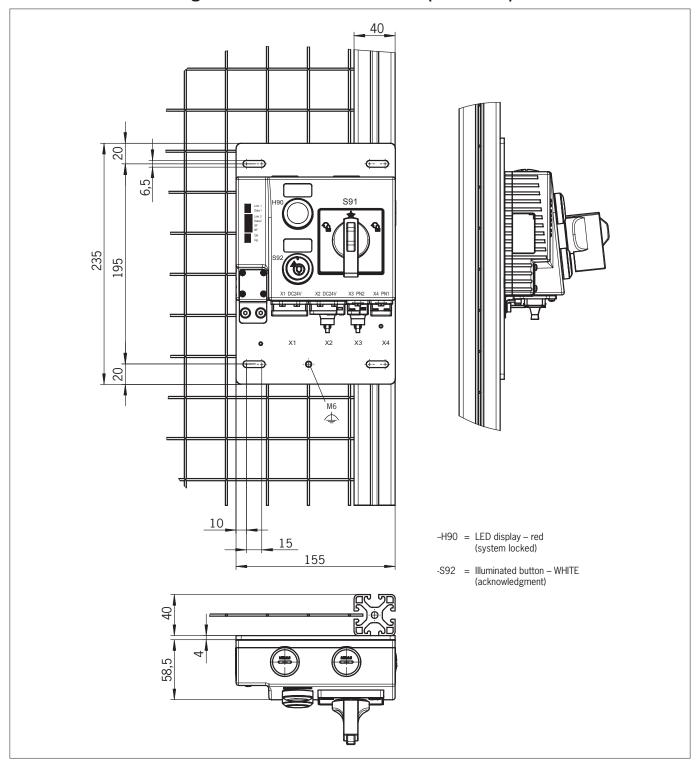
Dimension drawing for bus module MGB-B-...-PN (PROFINET)
